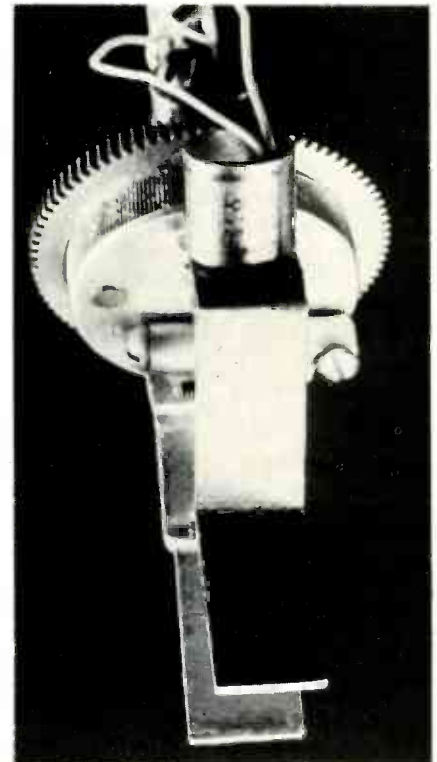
COMPLETED FINGER-TYPE end-effector. Gear is non-functional, but adds to appearance.
